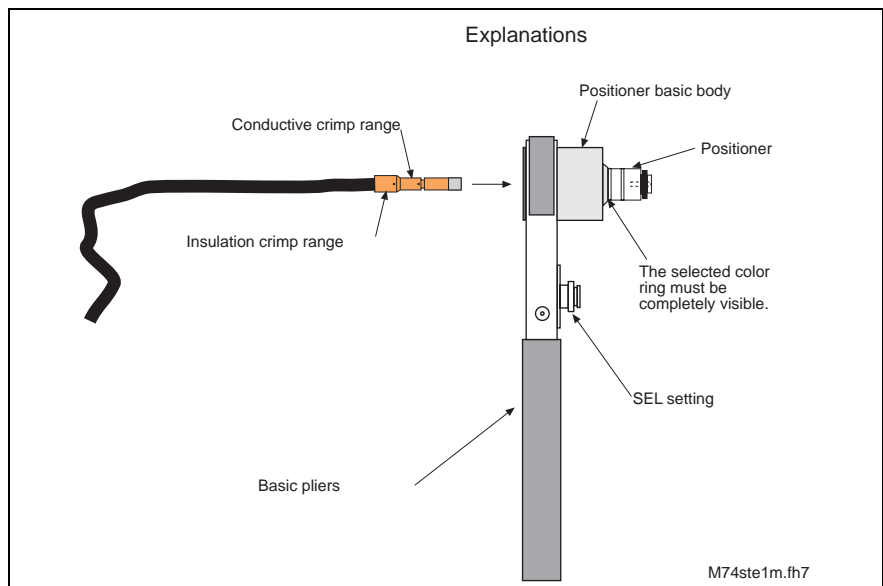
Crimping tool INS0680 to 0683 - details and designations
